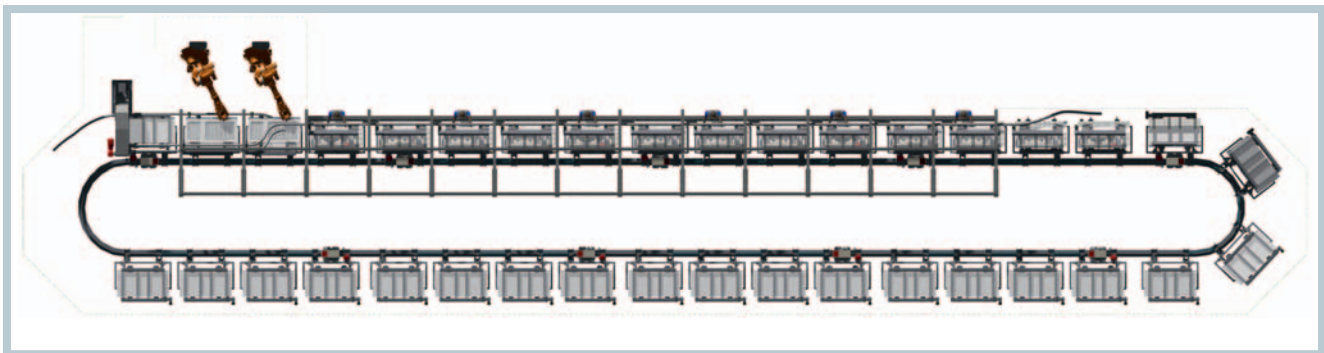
System layout with the final set of mold carriers (figures: Frimo Group GmbH)
